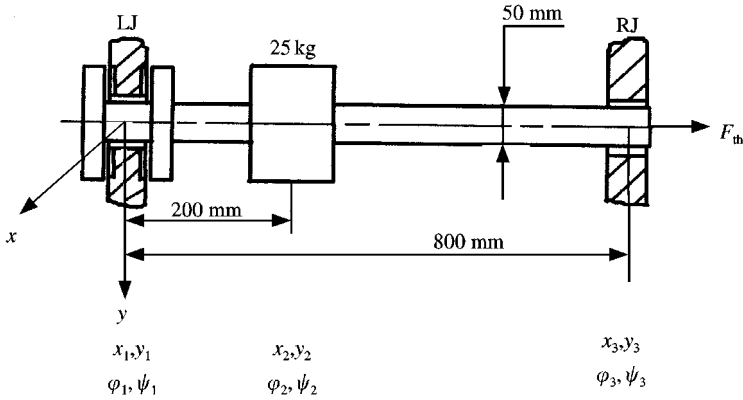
A rotor-bearing system with a hydrodynamic thrust bearing.
